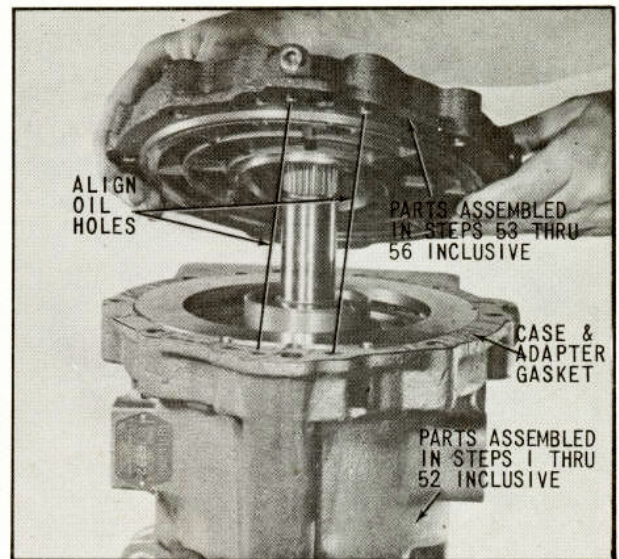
Assembling Adapter and Reverse Clutch Assembly onto Case
